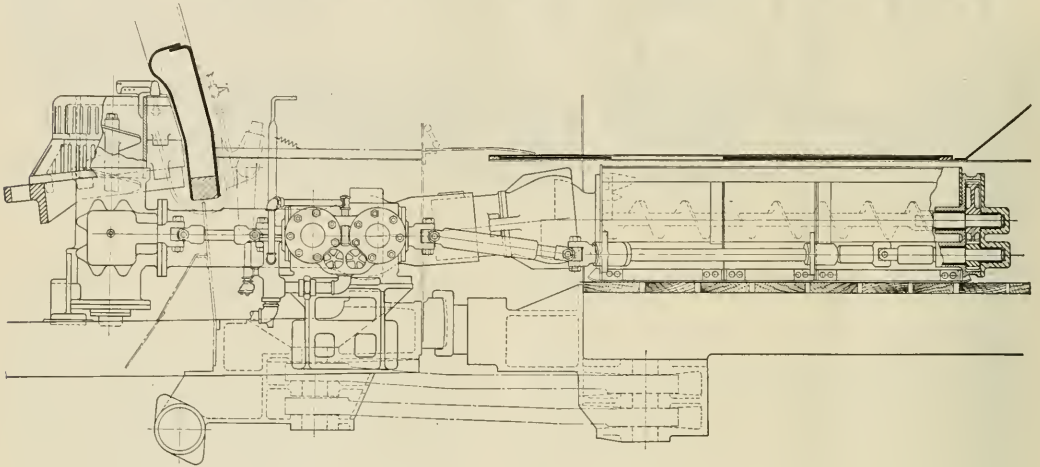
Side Elevation Drawing Showing Arrangement of Parts on the Locomotive
